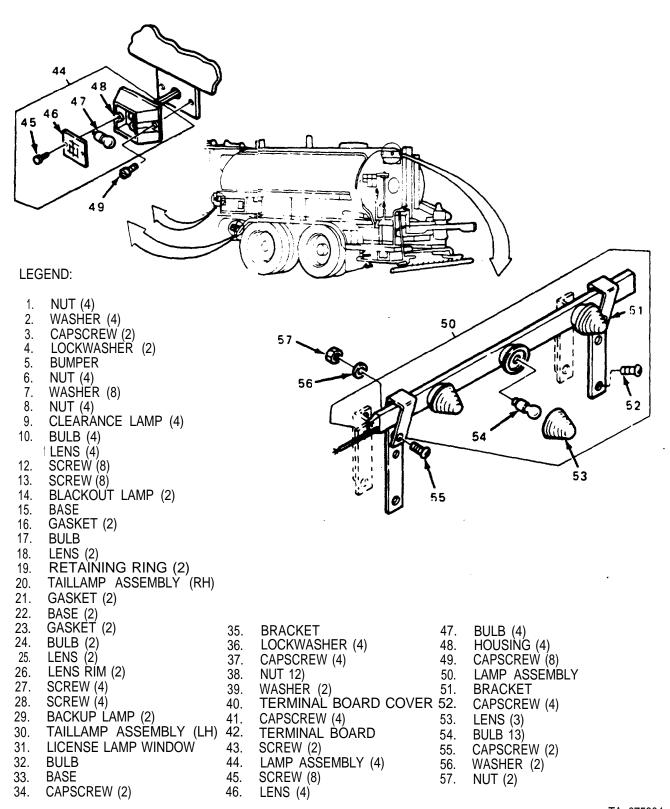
Remove/Install Loom Bumper and Marker Lamps (Sheet 2 of 2).
